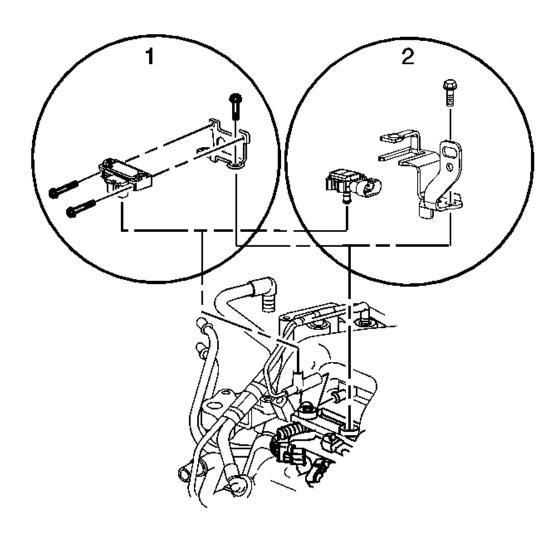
Installing MAP Sensor Courtesy of GENERAL MOTORS CORP.
